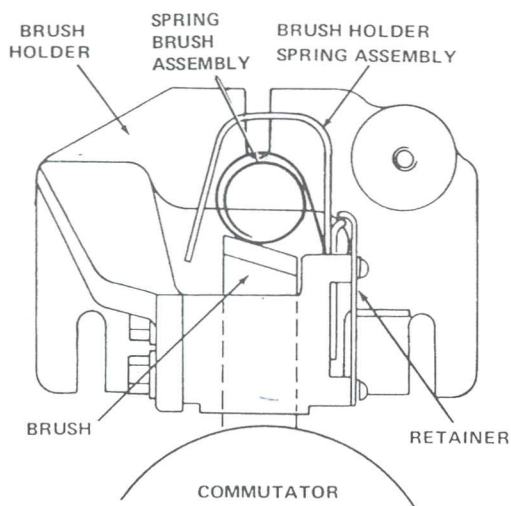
Constant-Pressure Brush Holder, DC Motors
